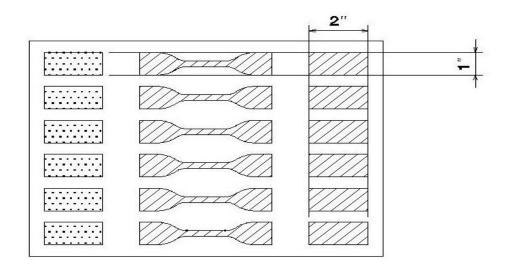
Sealant Tensile, Volume Swell, and Hardness Test Specimen Mould. As seen in Figure specimens are made in shapes of dumbbell and rectangular. Dumbbell specimens are moulded in accordance with ASTM D412 Die C. Hardness and volume swell specimens are represented by dotted and dashed areas respectively. The thickness of dumbbell and volume swell specimens is 2 mm. Hardness specimens are 6 mm thick. Figure 4.12 shows the examples of cured sealant specimens.
